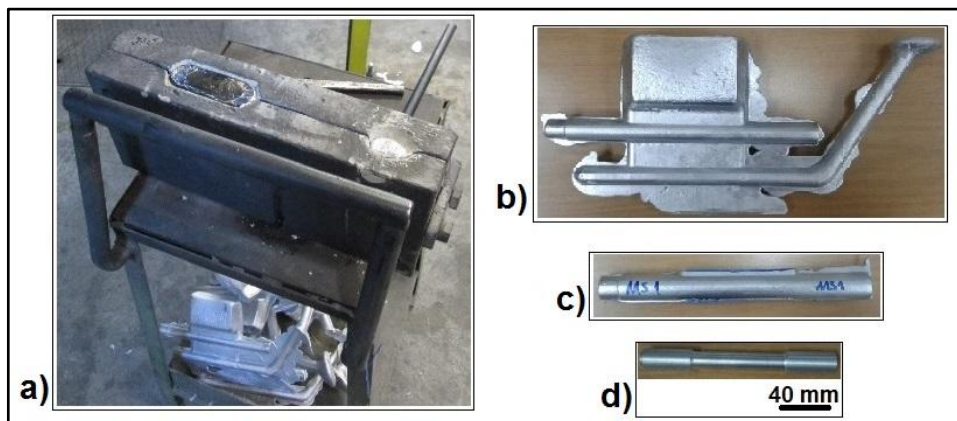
a) Tensile test bar mould, b) Uncut specimen, c) Sawed specimen, d) Machined to $d_0=12$ mm tensile test bar
